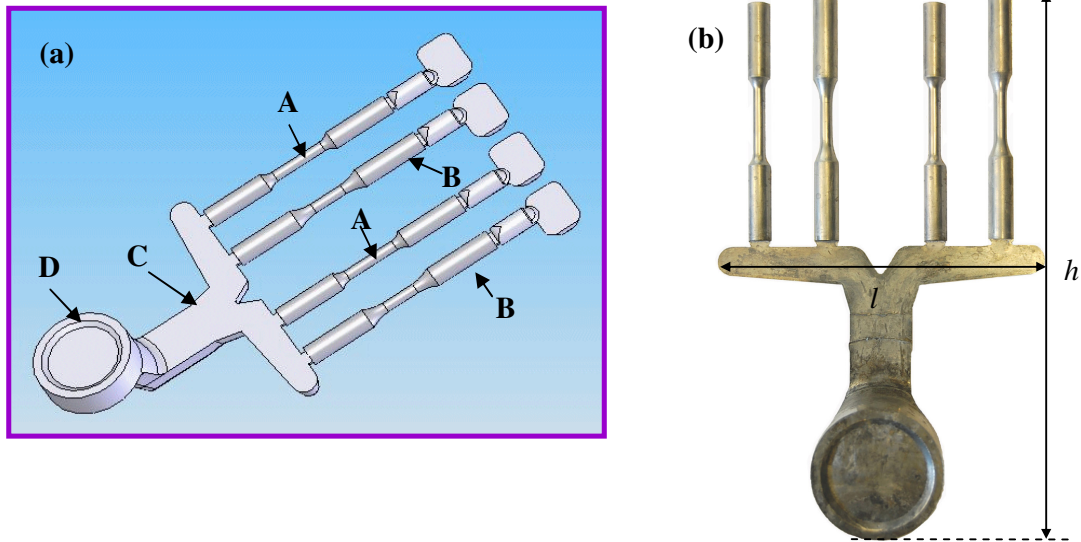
(a) Schematic illustration of a die-cast component with runner system produced from the HPDC machine and (b) Al-Si alloy die-cast component, (A) Tensile sample (diameter 6.4 mm), (B) Fatigue sample (diameter 6.3 mm), (C) Runner, and (D) Biscuit. Full dimension of test specimen is 23 cm length ( $l$ ) and 32 cm height ( $h$ ).
